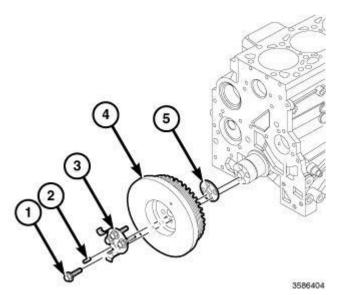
Crankshaft Damper (High Output Engine) Courtesy of CHRYSLER GROUP, LLC
